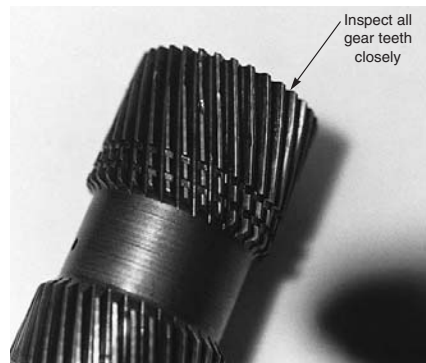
Gear teeth on all of the planetary gears should be closely inspected for chips, cracks, scoring, and wear. Also, check for worn snap ring grooves or bushings. Replace any damaged gears. (DaimlerChrysler)
